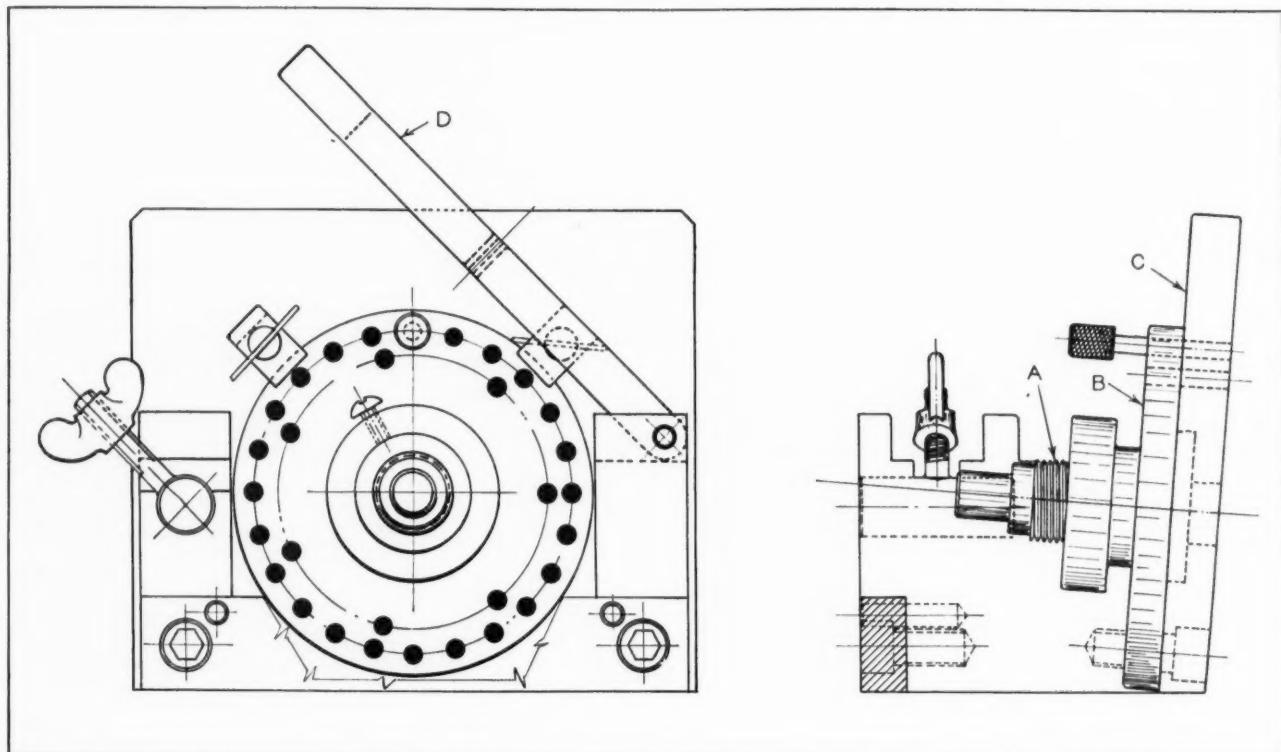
Indexing Jig Used in Drilling 0.010-inch Holes in Atomizer Nozzle
